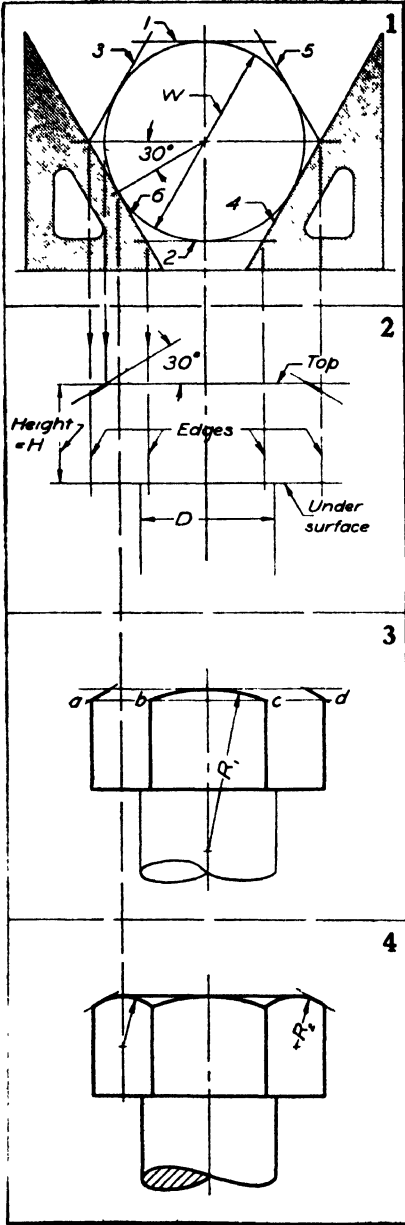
Method of drawing a hexagon bolthead across corners.
